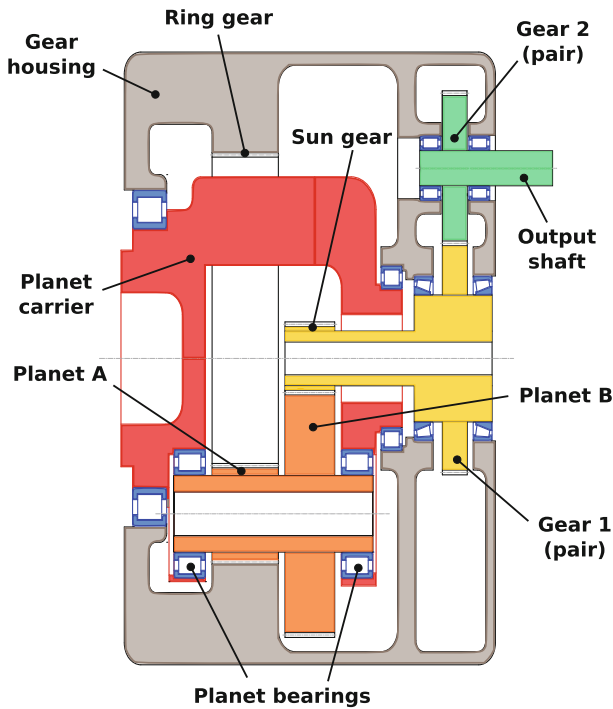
Cross sectional drawing of the gearbox (adapted from [17]).
